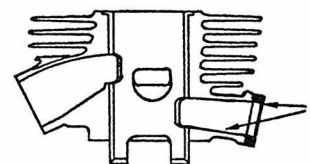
Area of cylinder to be modified to match internal diameter with larger carburetors.
